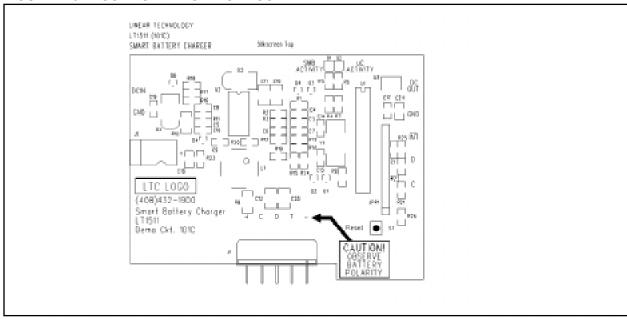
COMPONENT SIDE SOLDERSIDE
